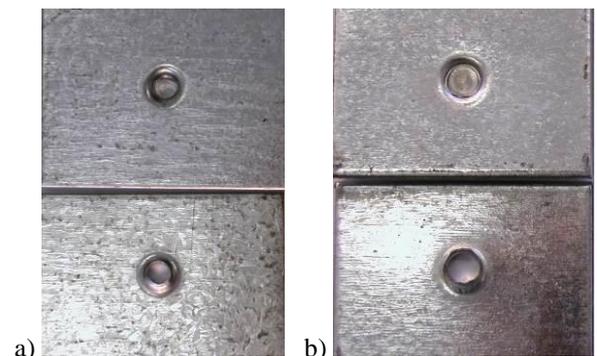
Dimension of the joined sample with sheet thickness of 1.5 mm (a) and 2.5 mm (b)
